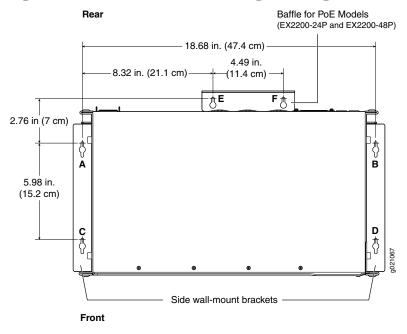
Attaching Wall-Mount Brackets to a Switch Chassis
